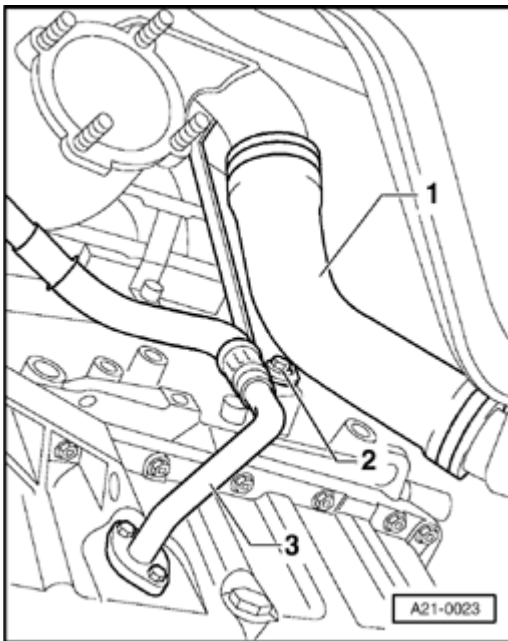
Identifying Upper Air Line Air Hose & Oil Return Line
